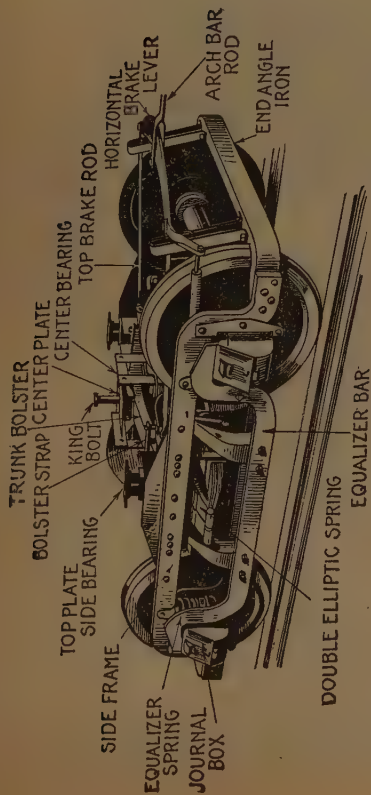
,653.—Standard motor Co., M.C.B. type high speed truck.
